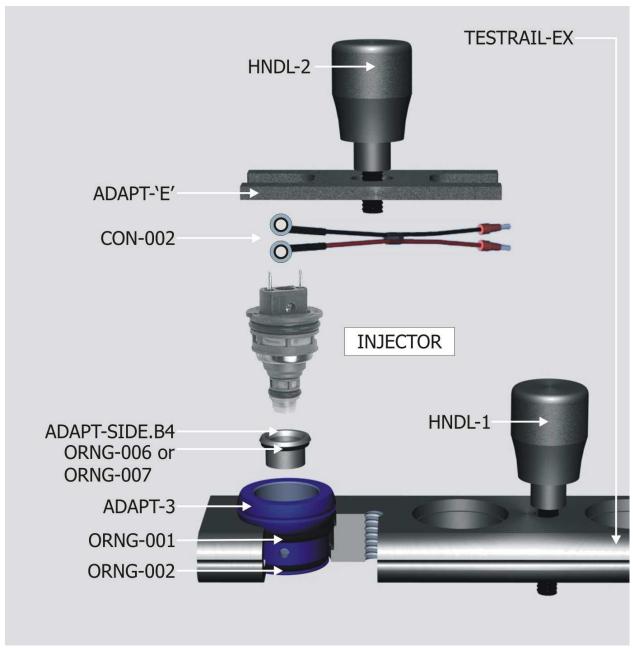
xv, Side-Feed Type (B) Fitting Illustration (5)
